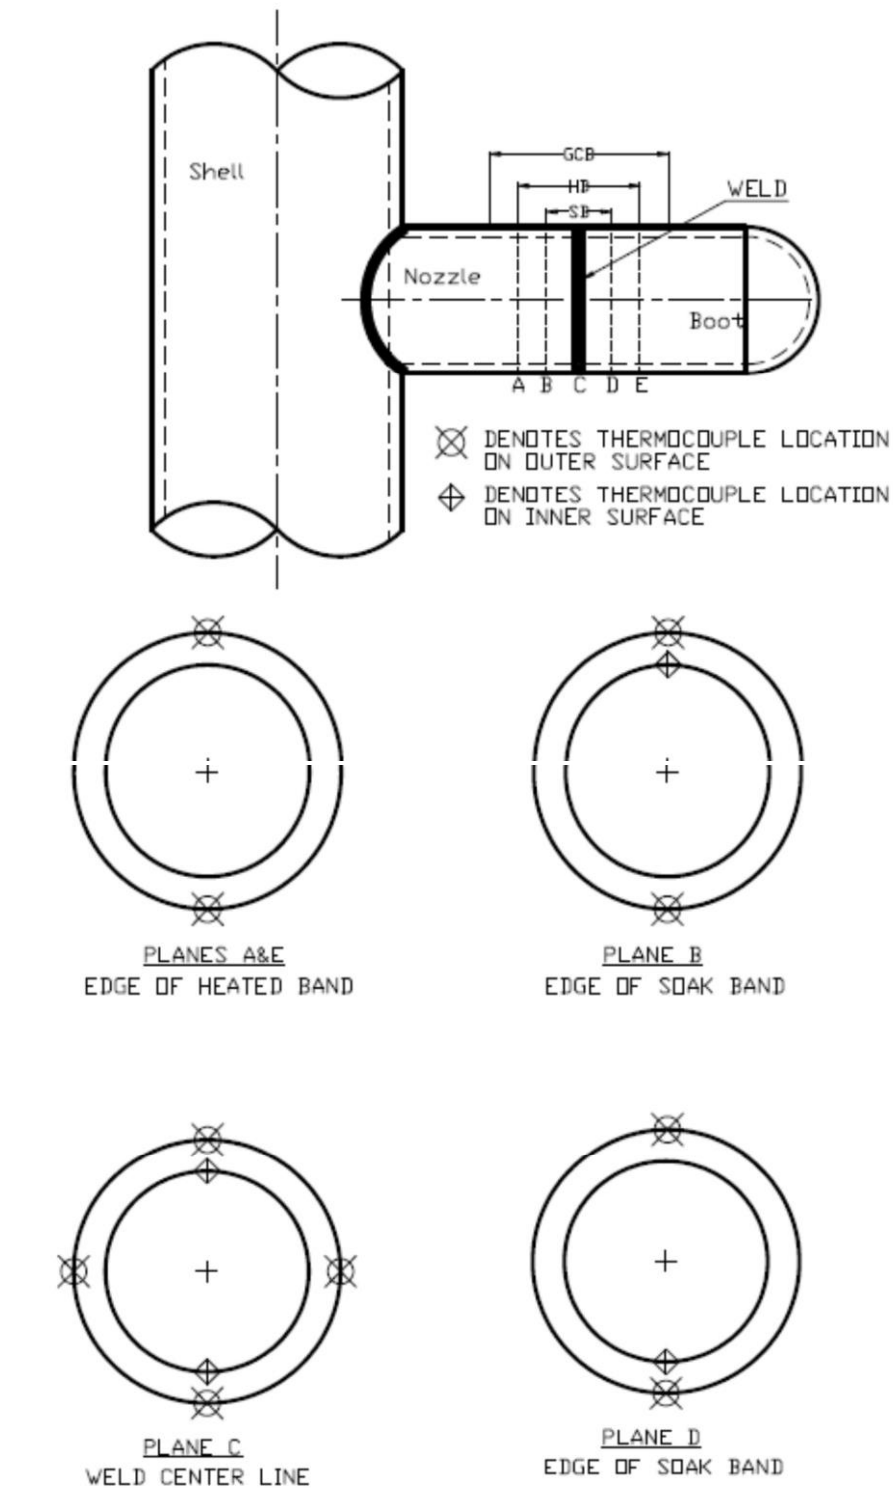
Schematic representation of Minimum no. of thermocouples when heating a Boot shell/Pipe to Nozzle weld
